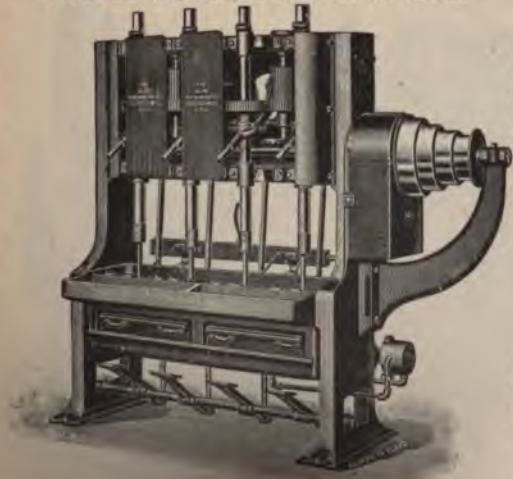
SHOWS FOUR SPINDLE MACHINE.
